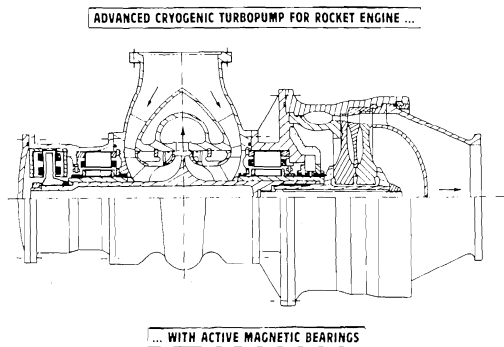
Cross section of a rocket engine turbopump on AMB (Courtesy of SEP)
